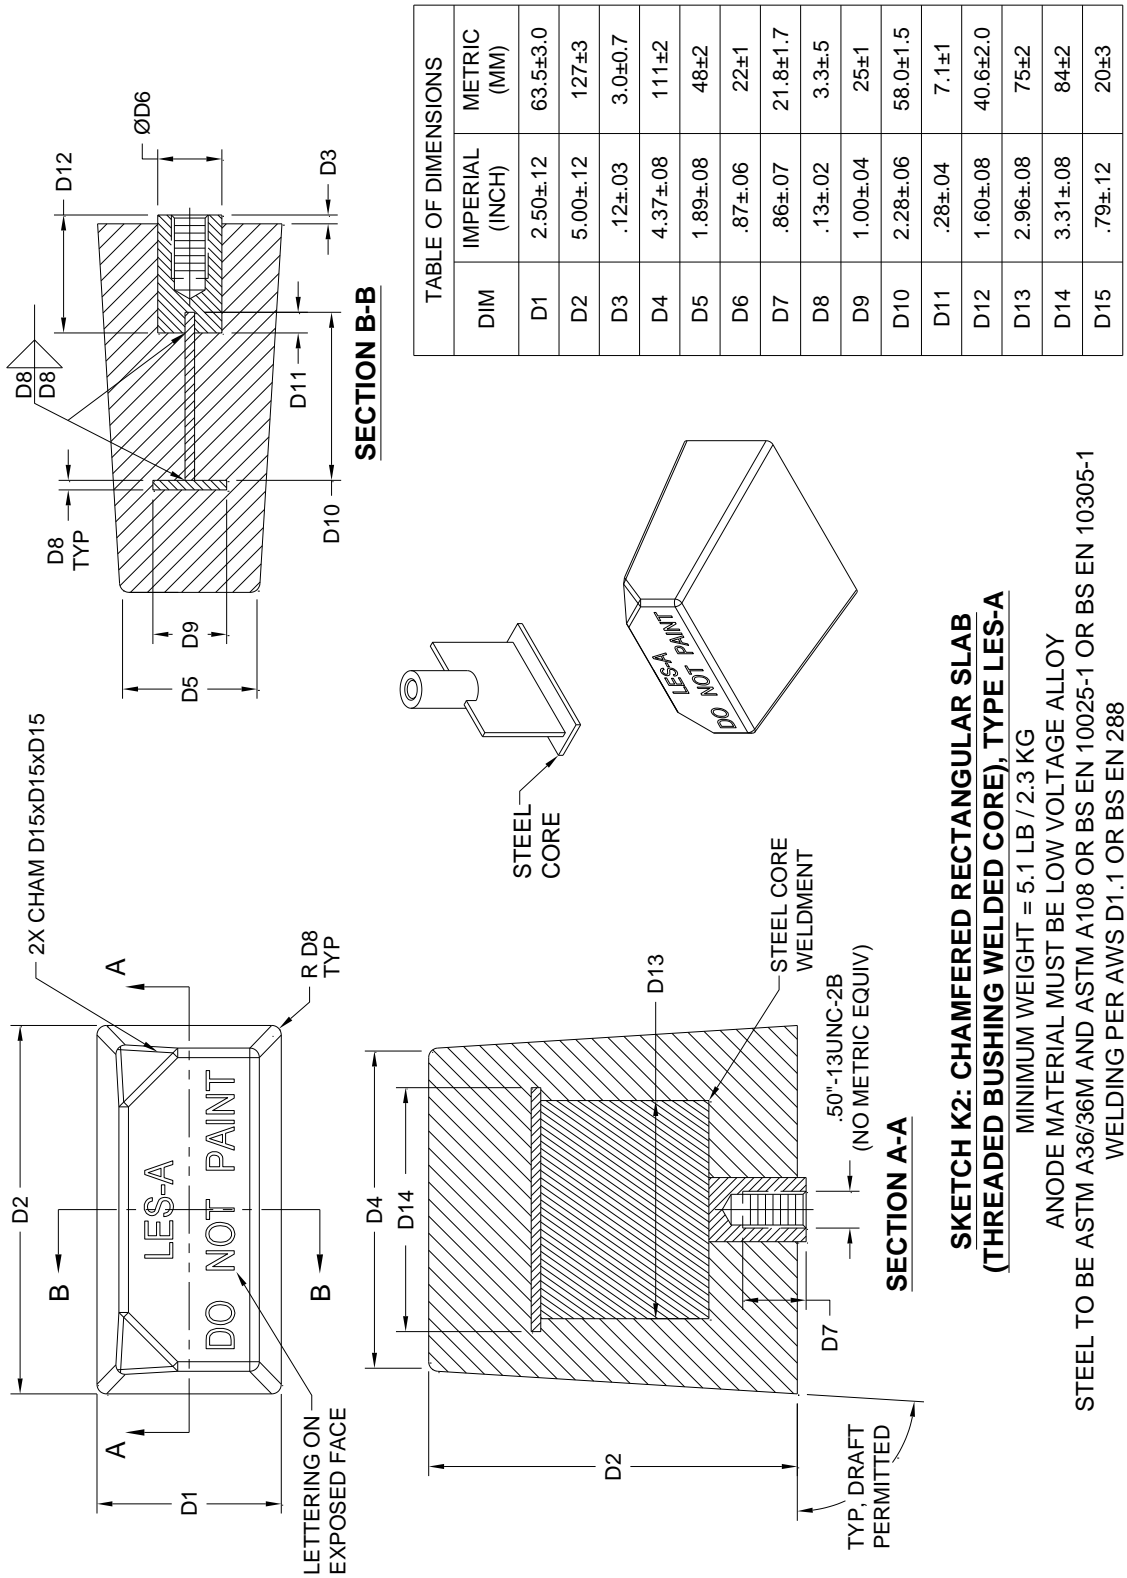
Aluminum, chamfered rectangular slab (threaded bushing welded core) type LES-A.
